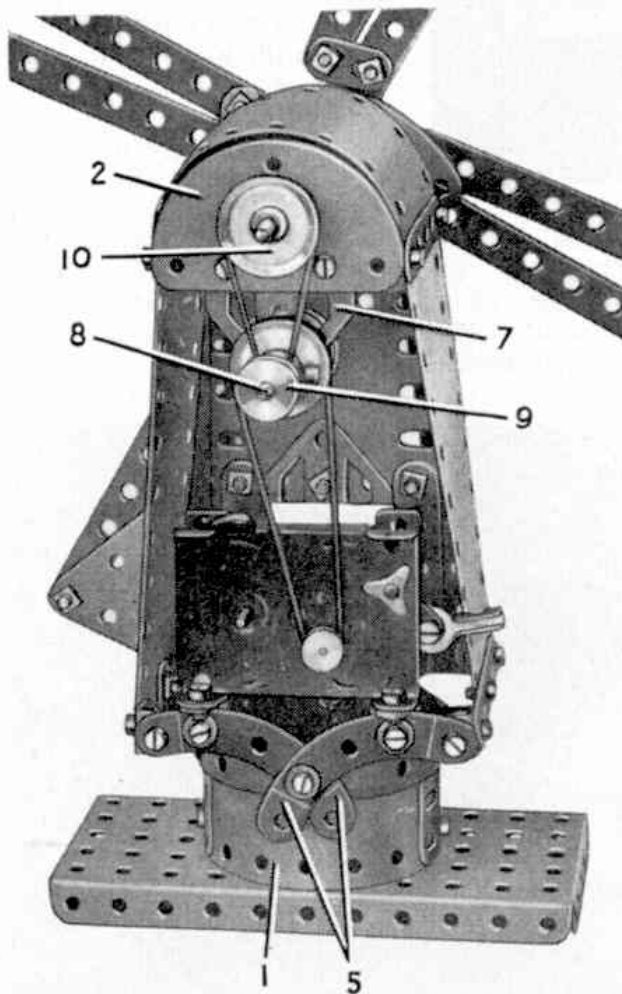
This view of the Windmill from the back shows the drive to the sails in detail.
